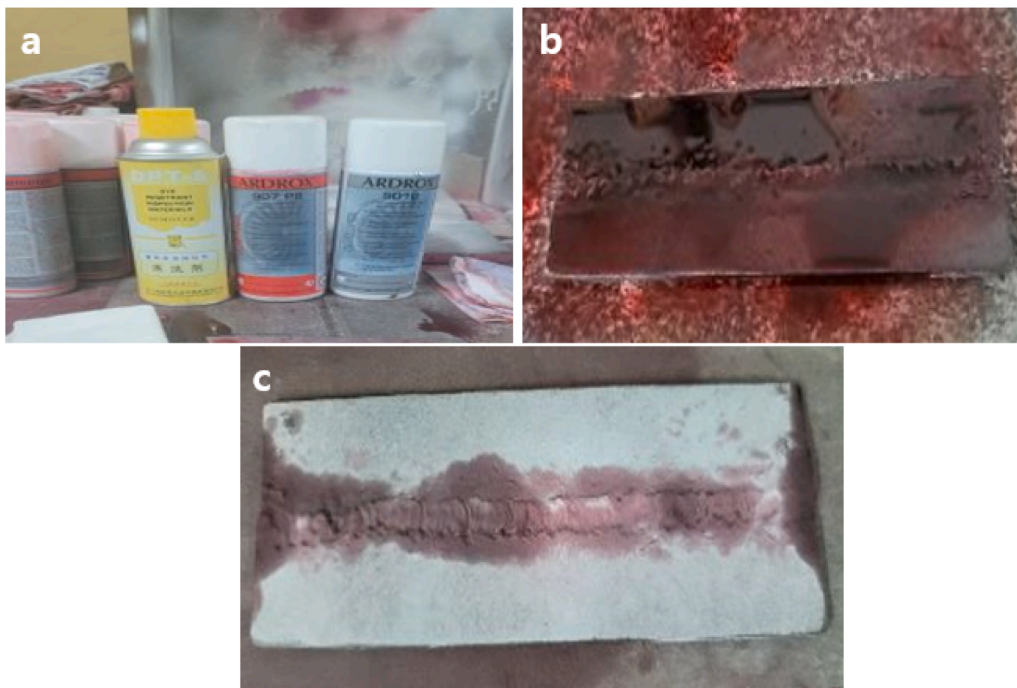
(a) Non-aqueous developer spray, (b) Sprayed welded piece, and (c) Drying up of the developer on the welded piece.
